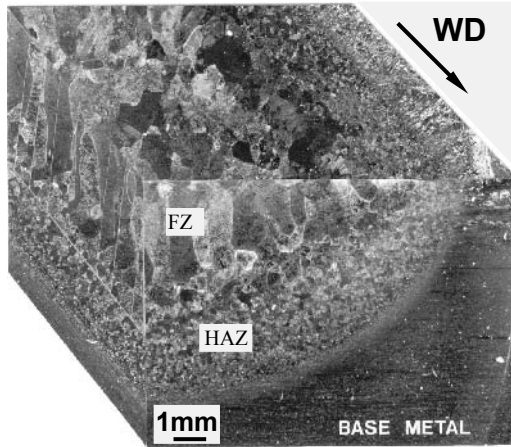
Low magnification composite photo of a fusion weld, LM
